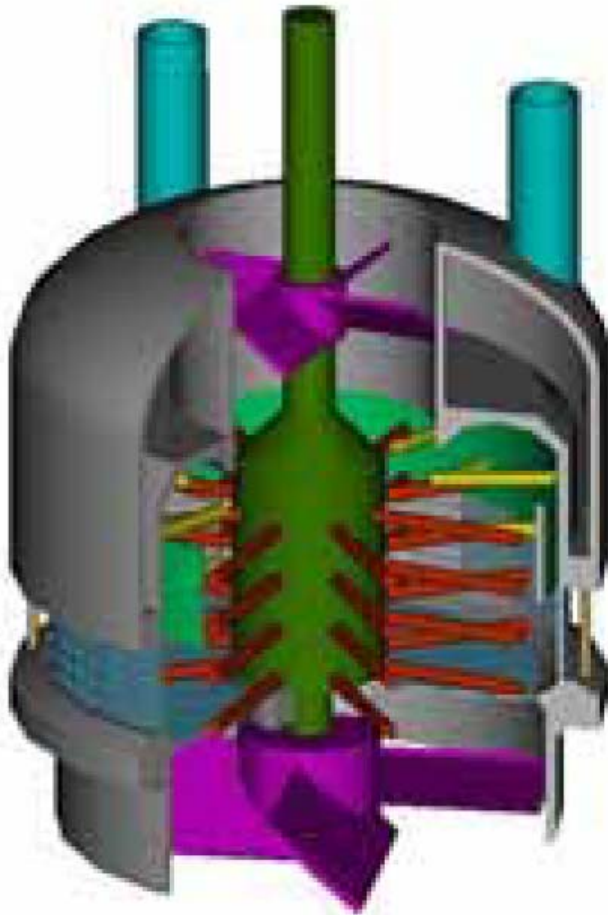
Representation of Immersion Mill showing the rotating shaft with pins that mobilize the grinding media and the CST. The mill rests in a tank with screens the size of the final particle size. The mixing impeller circulates the bed.
